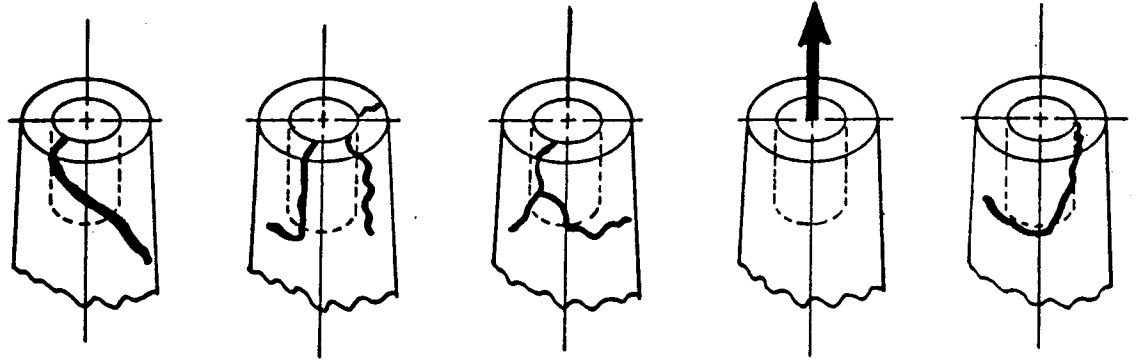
Boss Used for Preliminary Insert Pull Out Tests
